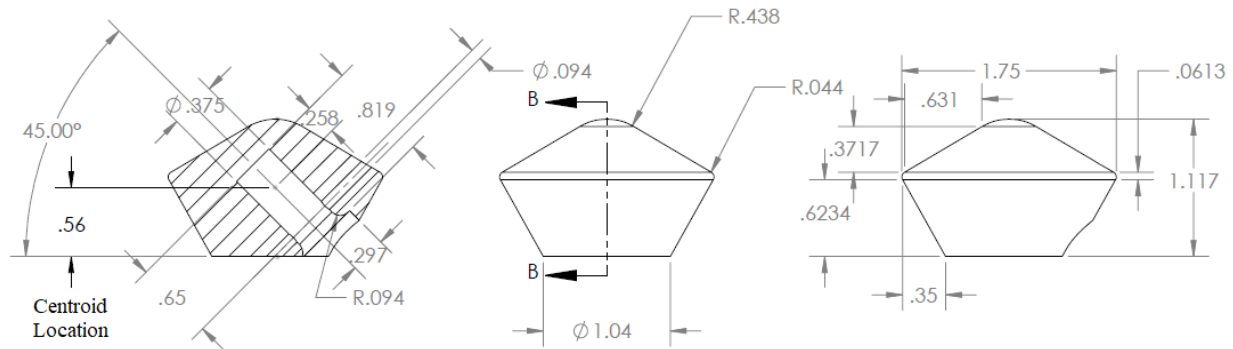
Drawing of  $45^\circ$  model for use with sting and MS-100 balance. Dimensions in inches. Same external geometry as the  $0^\circ$  model. The sting attachment point and dowel pin holes were rotated about the model centroid by  $45^\circ$ . Models at other orientations have the attachment point rotated about the centroid by the desired angle.
